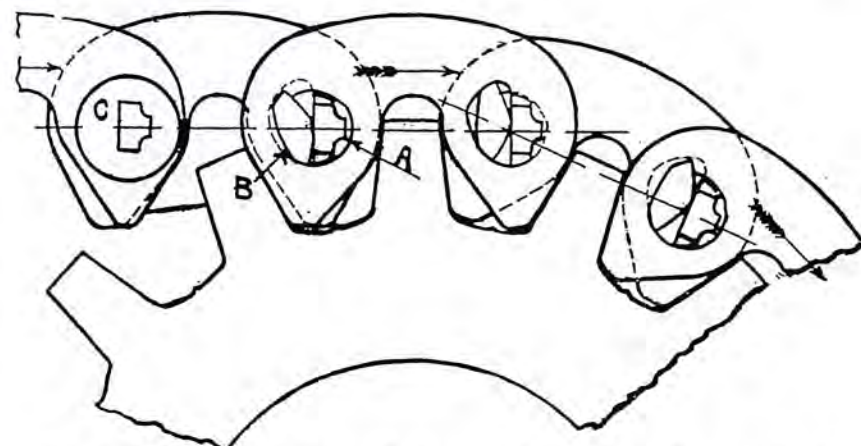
Correct Positions for Rocker and Seat Pins in Riveting Chains.
